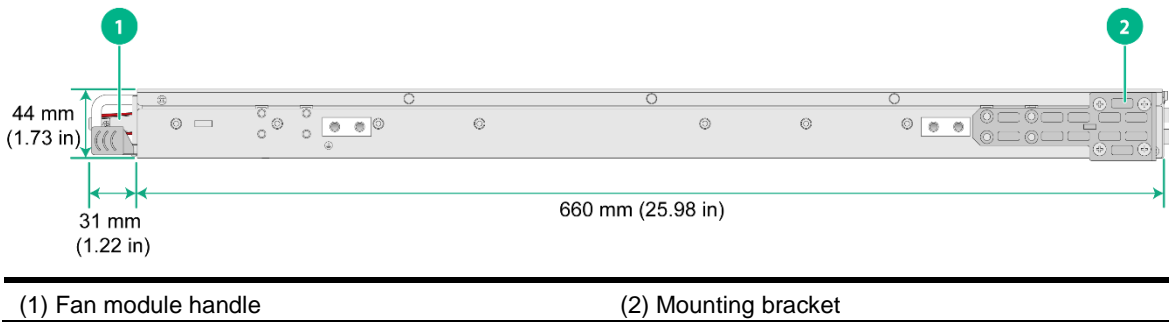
S9855-48CD8D/S9855-24B8D/S9855-32D switch dimensions with mounting brackets installed at the power supply side
